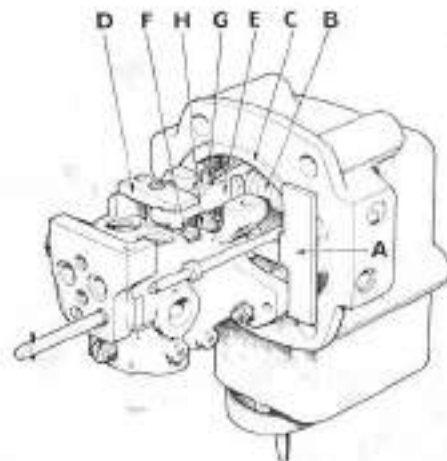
Using adjusting gage to check setting of traction control valve screw in rocker lever. Refer to text for procedure. Refer to Fig. 285 for legend.
